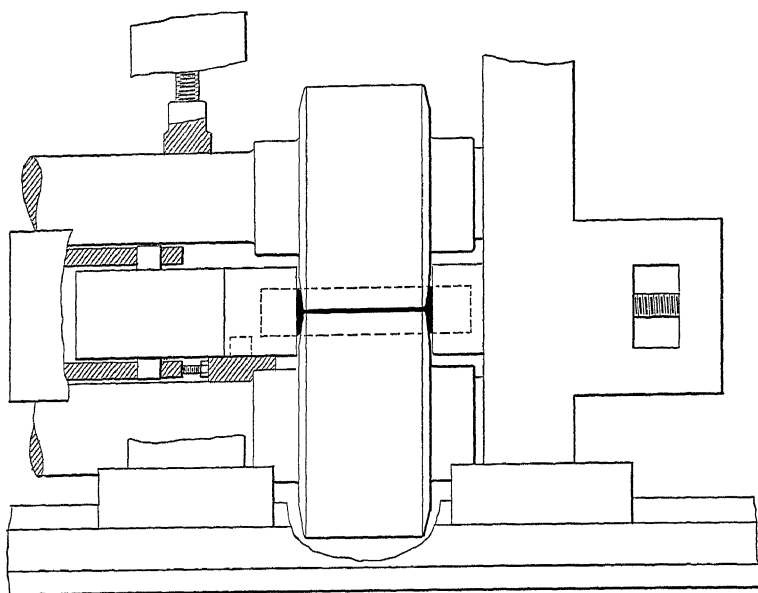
YORK UNIVERSAL MILL, SHOWING THE METHOD OF ROLLING AN 18-IN. BEAM WITH 6-IN. FLANGES.
